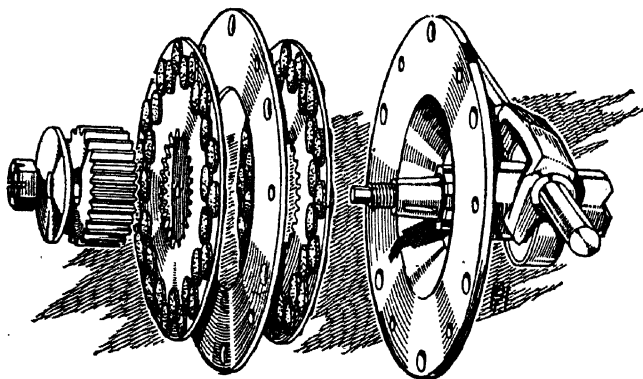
A Double Plate Cork Insert Type Clutch.
